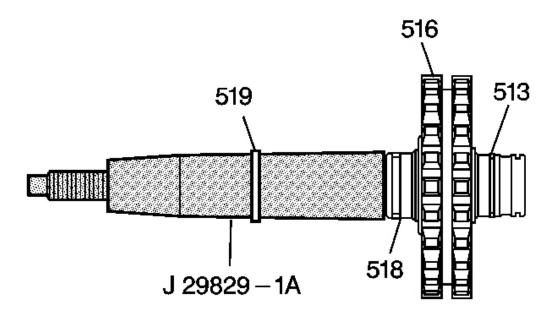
Installing J 29829-1A On Turbine Shaft Courtesy of GENERAL MOTORS CORP.
